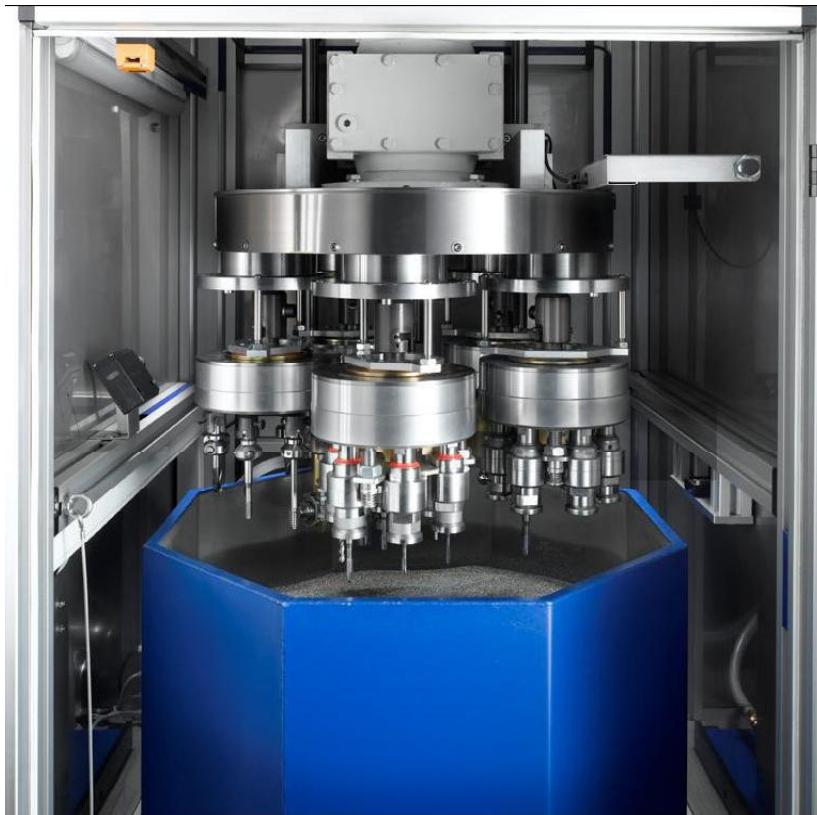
Drag finishing machine with planetary driven multiple tool holder for efficient and perfect processing
